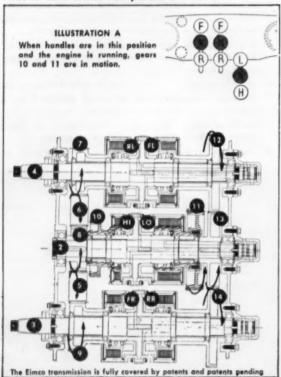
Illustration A shows all handles in Neutral. The engine drives input shaft #1 (which is omitted from this sketch because of its position and the fact that it runs constantly while the engine is running), and motion is transmitted to gears 10 and 11 which run free on shaft 2 Note: None of the shafts shown are turning.
